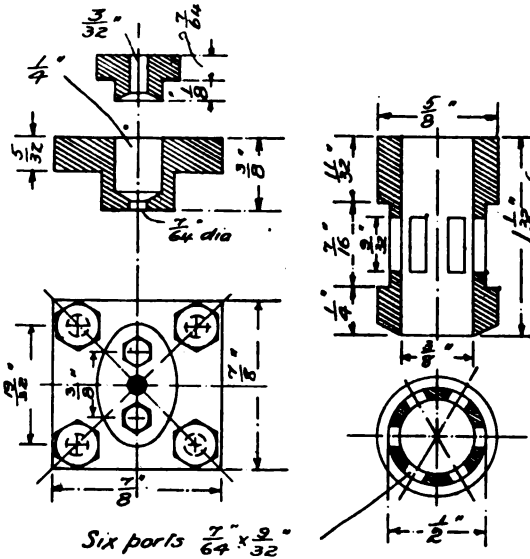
CAP AND GLAND OF THROTTLE AND THROTTLE VALVE LINER.
